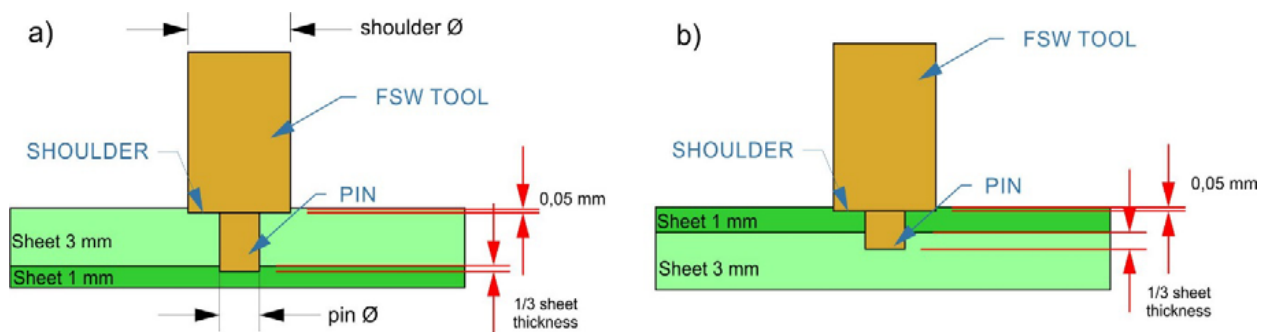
Scheme of sheet metal configurations and FSW tool, a) sheets 3 mm and 1 mm: set 3-1, b) sheets 1 mm and 3 mm: set 1-3
